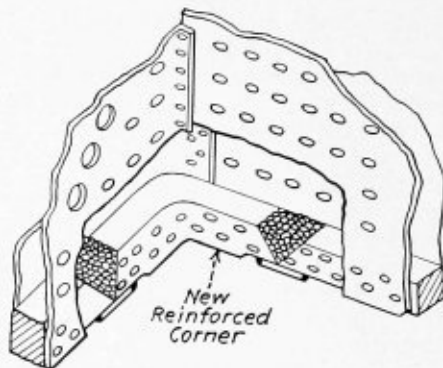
Showing Part of Side and Tube Sheet Removed and New Mudring corner Welded in Place
